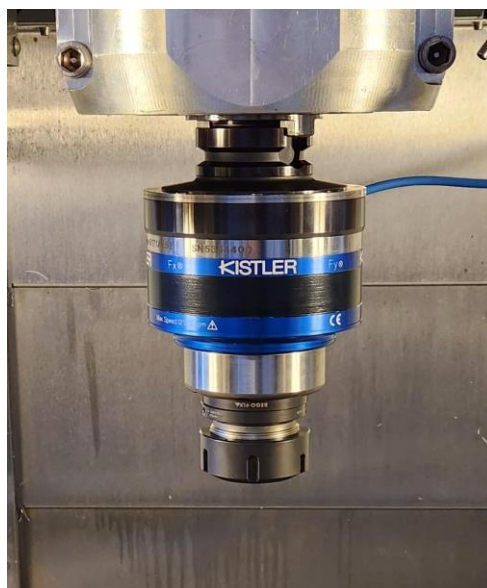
Equipment used to measure cutting forces: KISTLER 9171A dynamometer.
